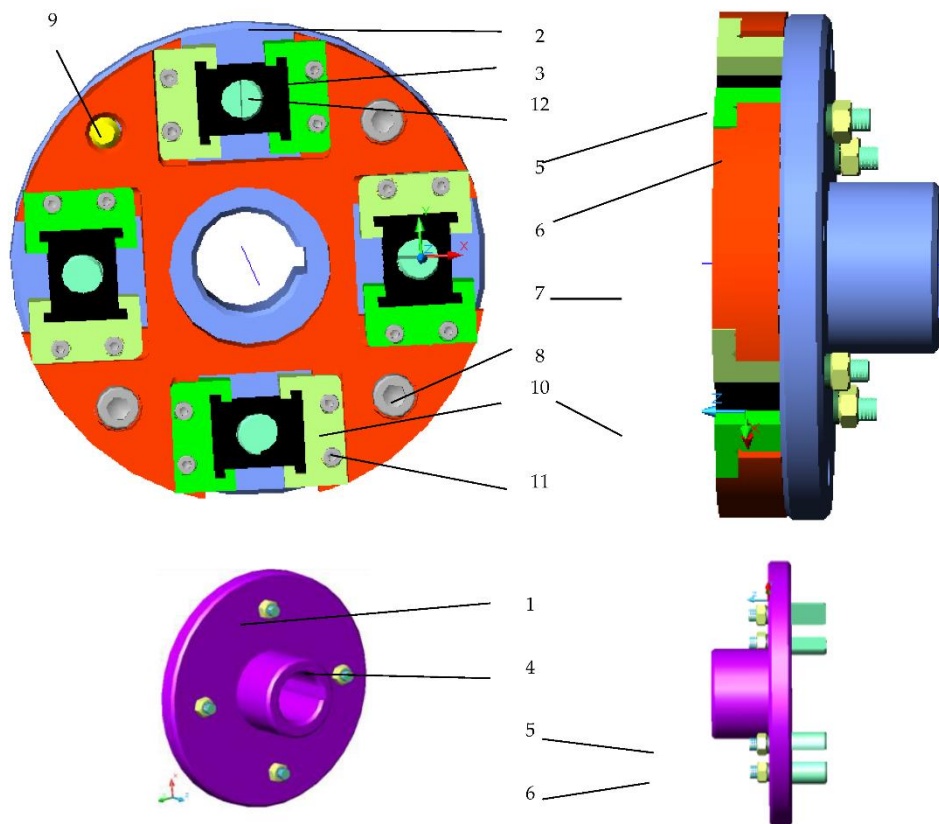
The flexible coupling with milled bolts and non-metallic elements. 1—driver semi-coupling; 2—driven semi-coupling; 3—non-metallic elements; 4—milled bolts; 5—Grower washers; 6—M8 nuts; 7—intermediary disk; 8—screws; 9—cylindrical pin; 10—metal plates; 11—screws; 12—milled bolts.
